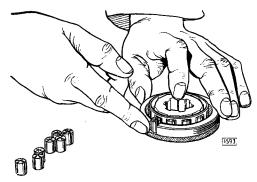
Assembling the uni-directional clutch using Part No. 1.178
